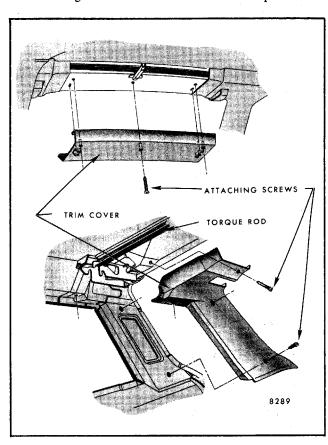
Torque Rod Trim Removal - H-15 Styles
